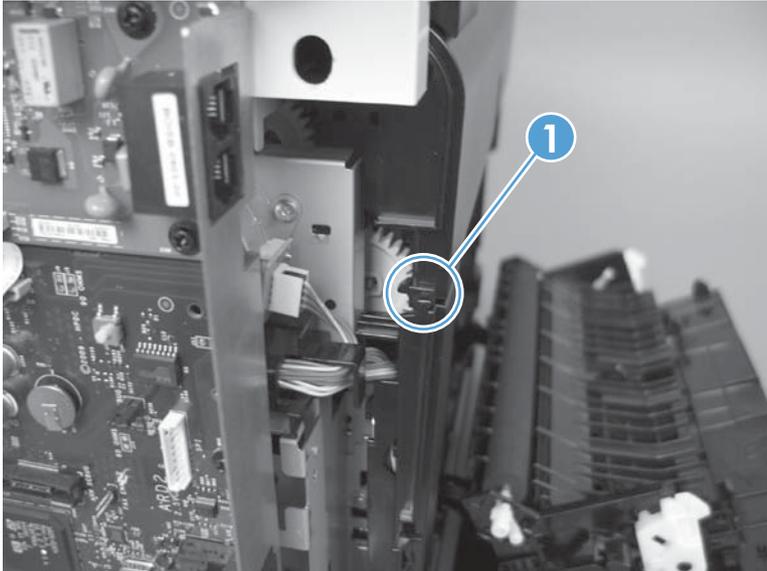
Remove the document-feeder and scanner assembly (3 of 3)
